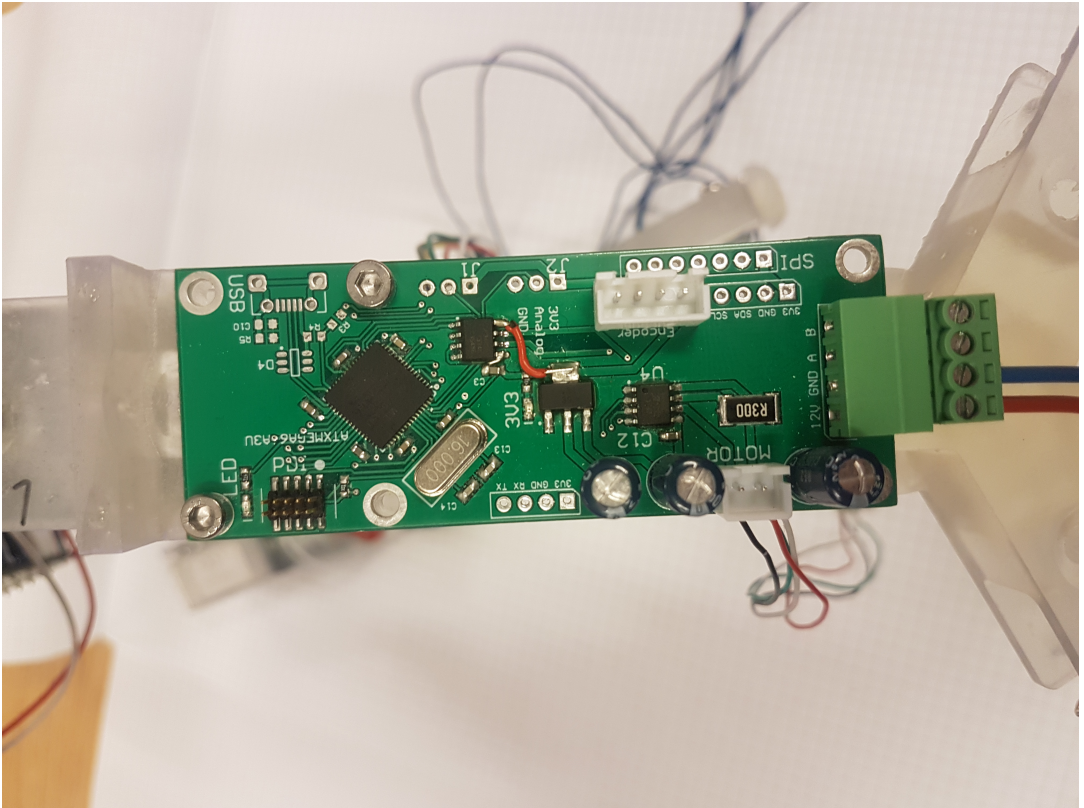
Picture of a motor driver designed and produced as part of the overall project.
